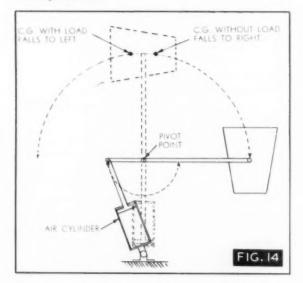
The cylinder is single-acting, working only on the pull stroke. When the load has passed top dead center, a speed control valve on the exhaust air line transforms the cylinder into a braking device. The roll-over mechanism capitalizes on a two-position center of gravity which changes with the arm load. Assuming the arm to be in a vertical position, the following must be true: The center of gravity of the load and bucket and that of the bucket alone must be on opposite sides of the center line of the arm through the pivot point. If this were not the case the arm would simply be forced to the vertical position and return to its original position, doing no useful work; or the arm might remain in a vertical position.
